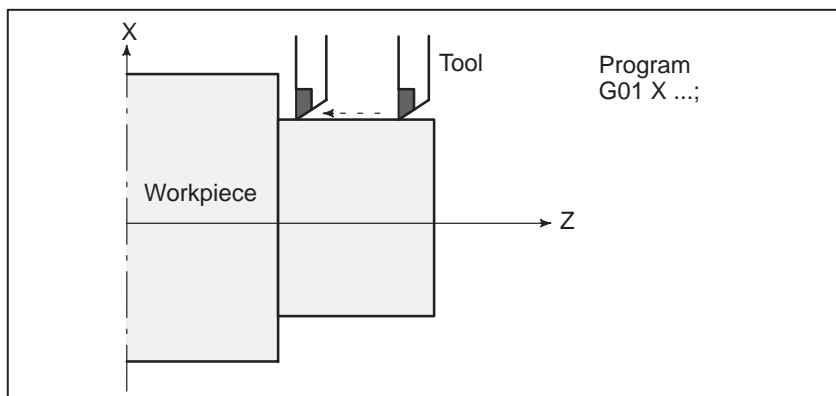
(a) Tool movement along the straight line which is parallel to Z-axis
